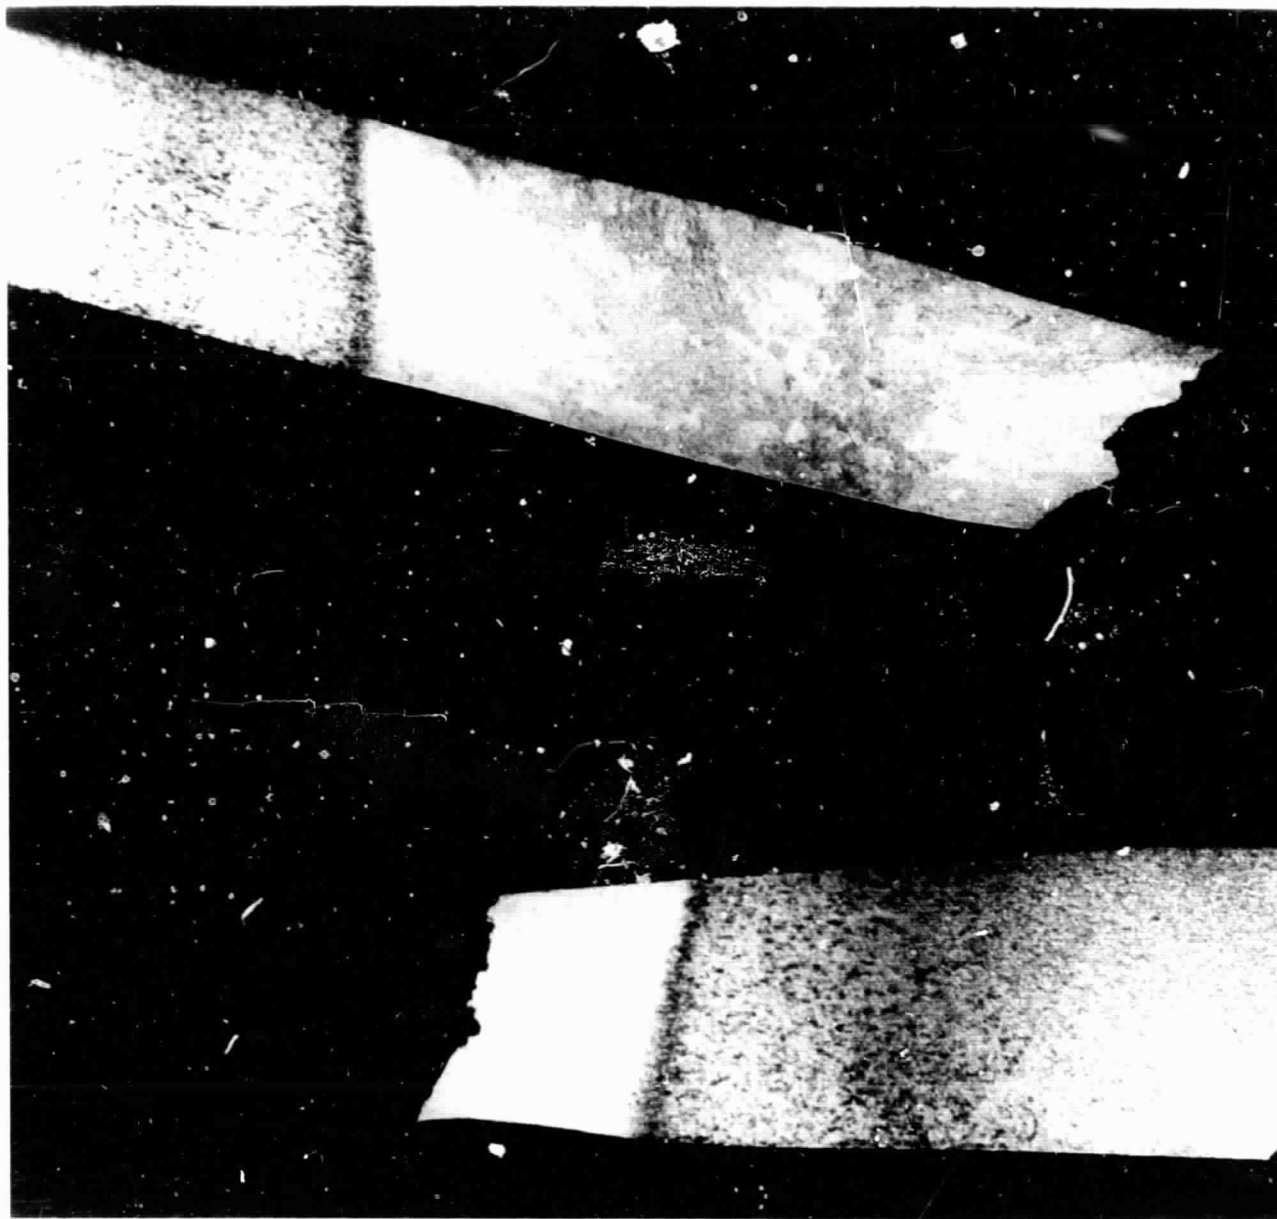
FRACTURED TENSILE SPECIMEN FROM PLATE 5W
